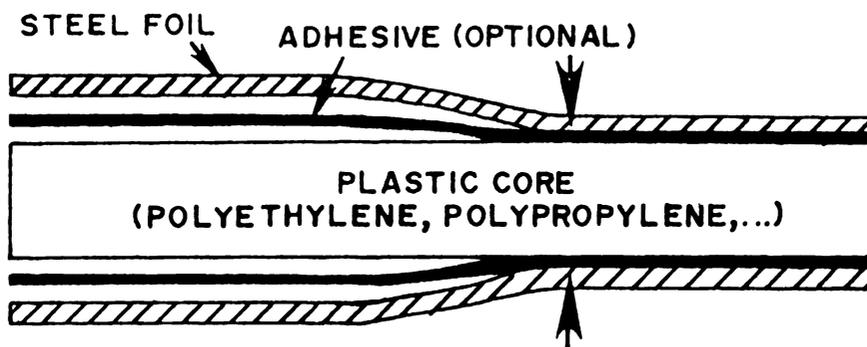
CONSTRUCTION OF A TYPICAL LAMINATE
